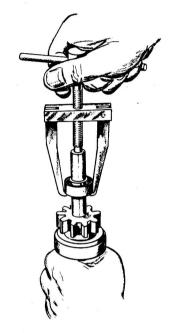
MOUNTING OVERRUNNING CLUTCH
